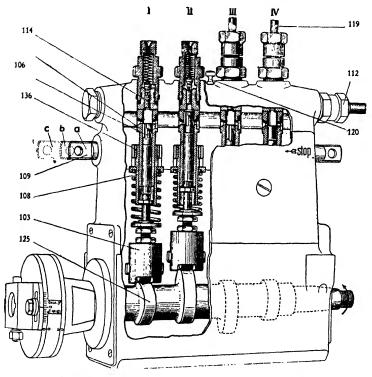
THE BOSCH FOUR-CYLINDER TYPE FUEL PUMP
